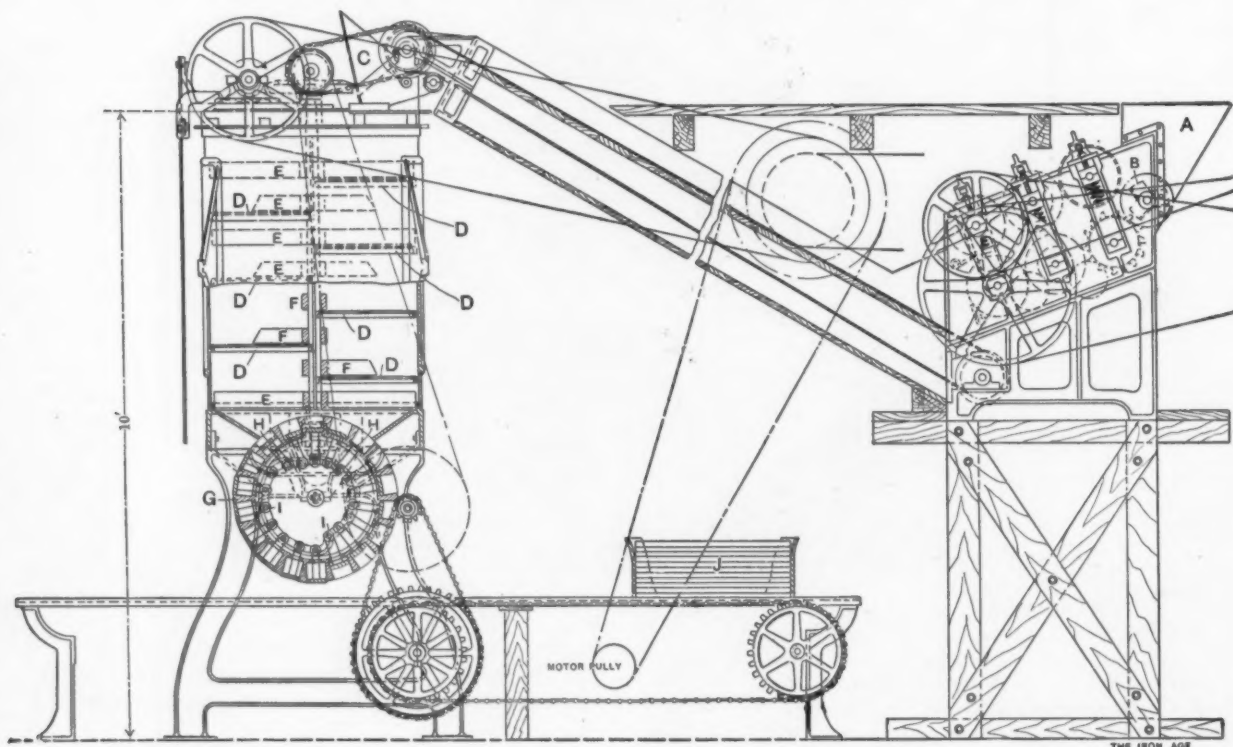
A Complete Plant, comprising the Condenser, Molding Mill and Auxiliary Apparatus.
